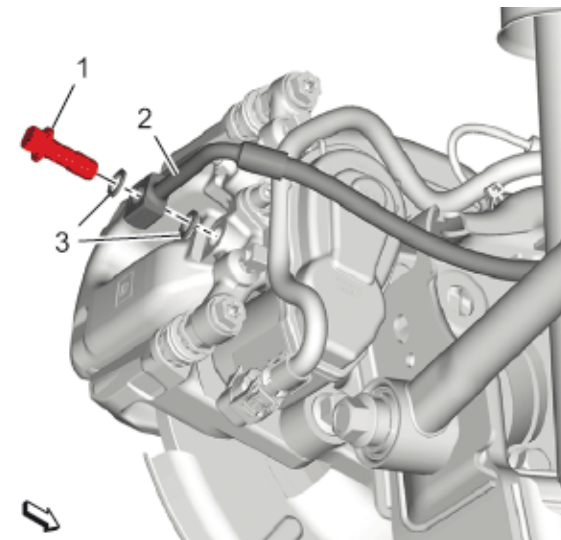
Brake Hose, Fitting Bolt And Sealing Washers
